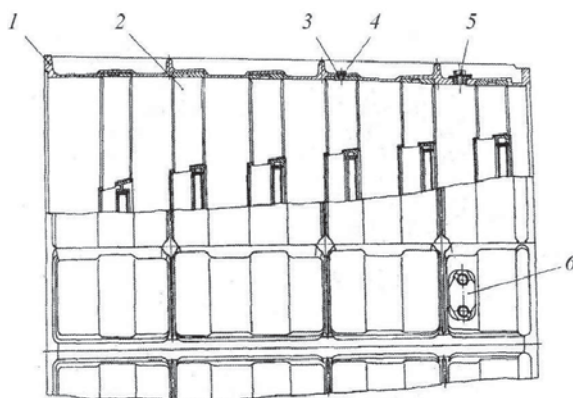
Low-pressure compressor housing of the D050 engine [15]:
